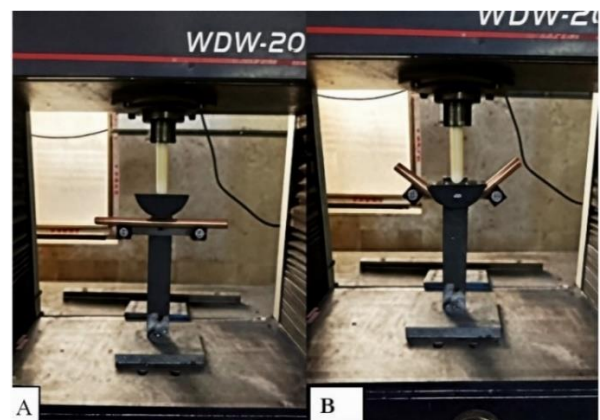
The photograph for the bending set, A) Initial arrangement, B) Final bending
